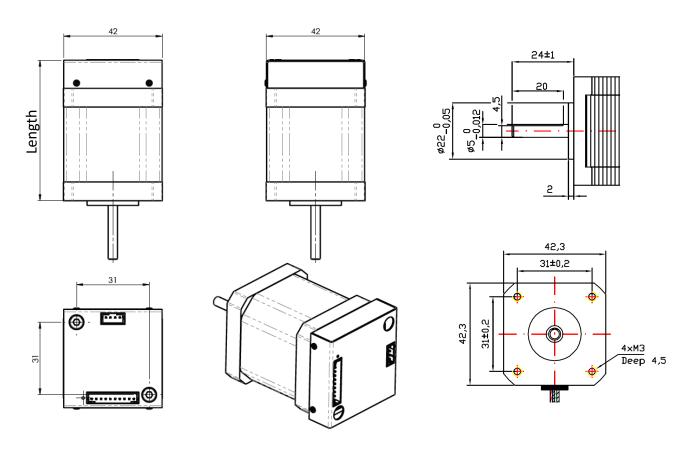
PD42-x-1370 with different NEMA17 / 42mm stepper motors (all dimensions in mm)
